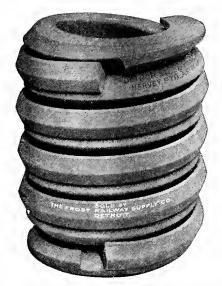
Harvey Friction Draft Spring. Frost Railway Supply Company.
